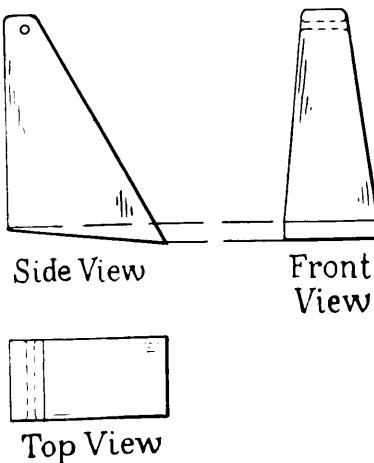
Three views of a horn. Horns are attached to the control surfaces, and the control wires run through a hole in them.
